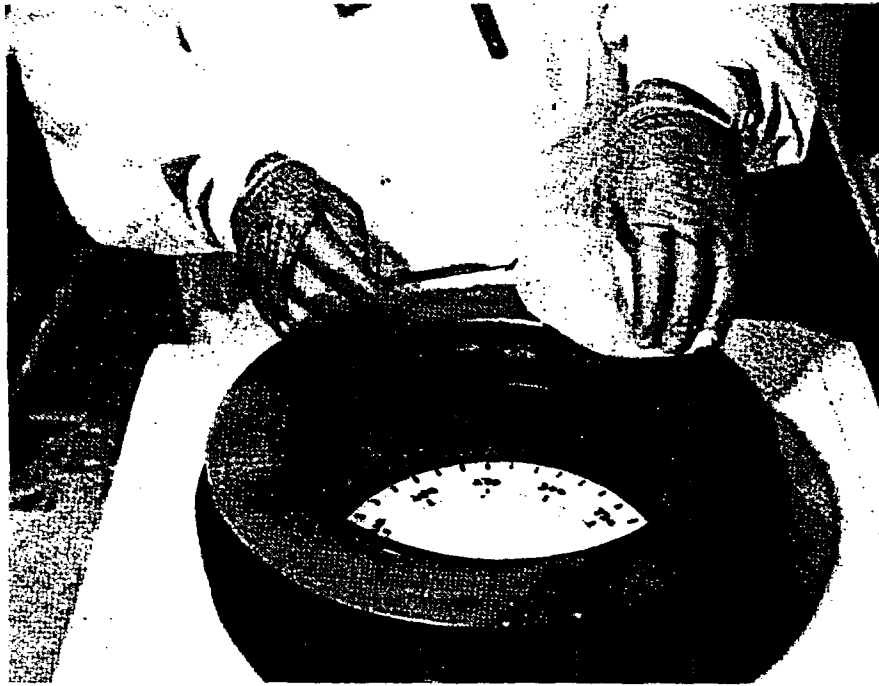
BNL ID #4A-CN5-797-86: Scraping of Crud From Seal Surfaces
